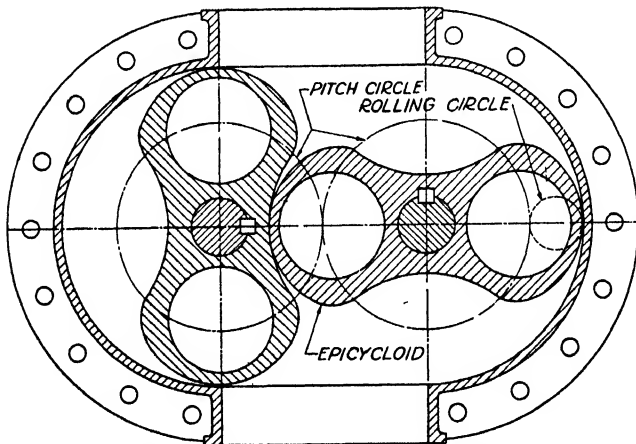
TRANSVERSE SECTION THROUGH ROOTS BLOWER.
